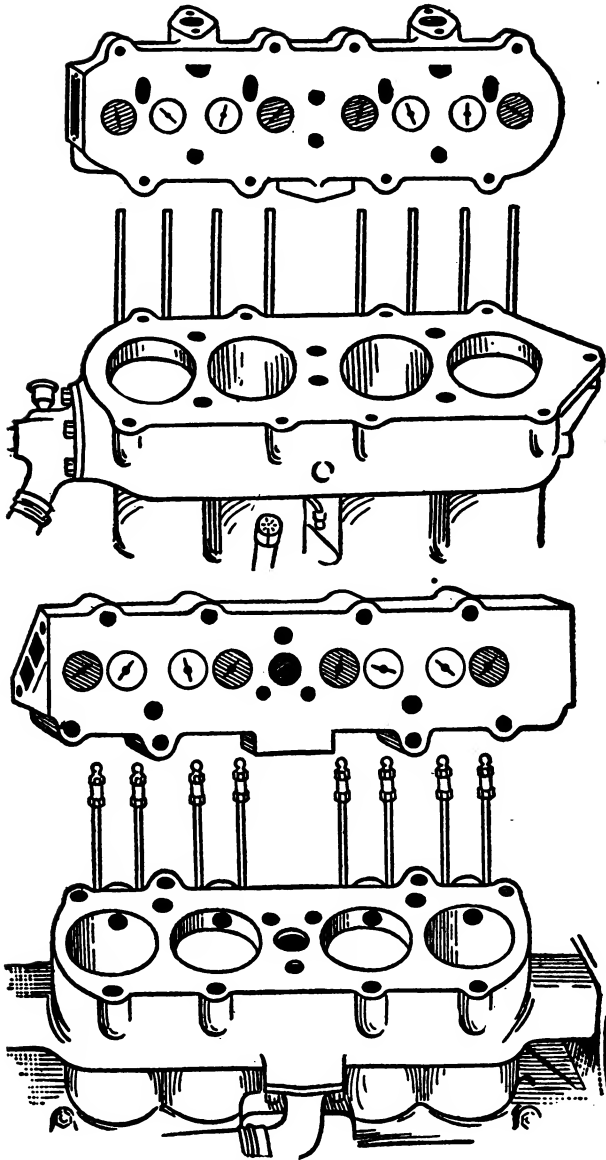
Cylinder and Cylinder-Head Assembly of the 1920 Chevrolet Showing the Valve in the Head Construction
